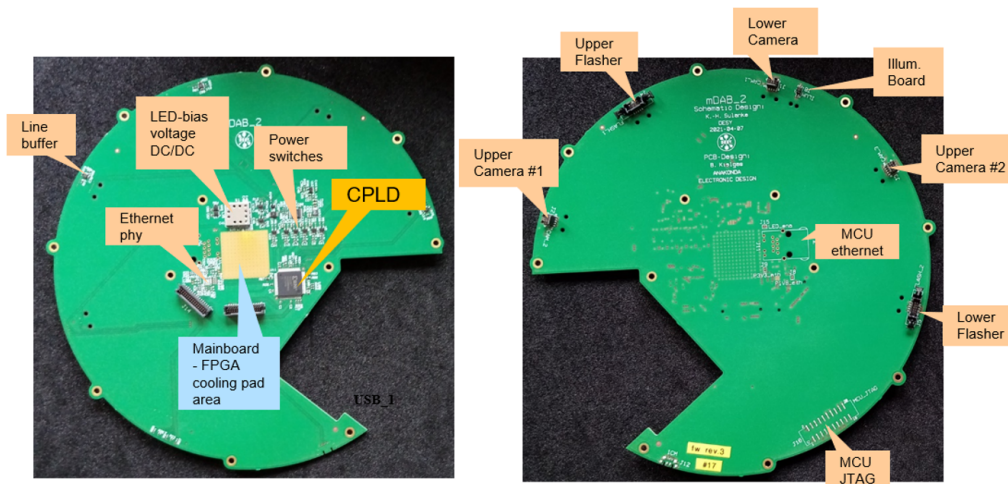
Photographs of the mDOM adapter board: bottom view (left) and top view (right).
